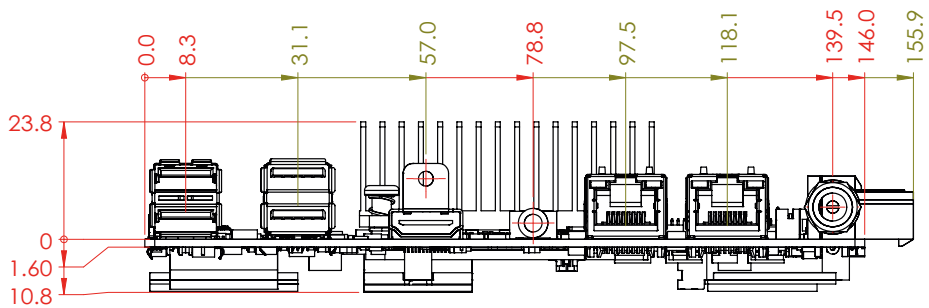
Mechanical Drawing with Heatsink (Coastline)
